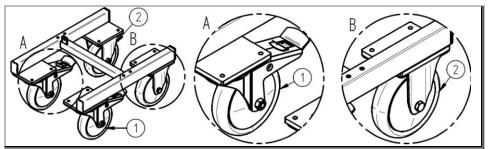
Parts list: Support placement option HE/HM casters with bolt hole ZZ.982.0068
